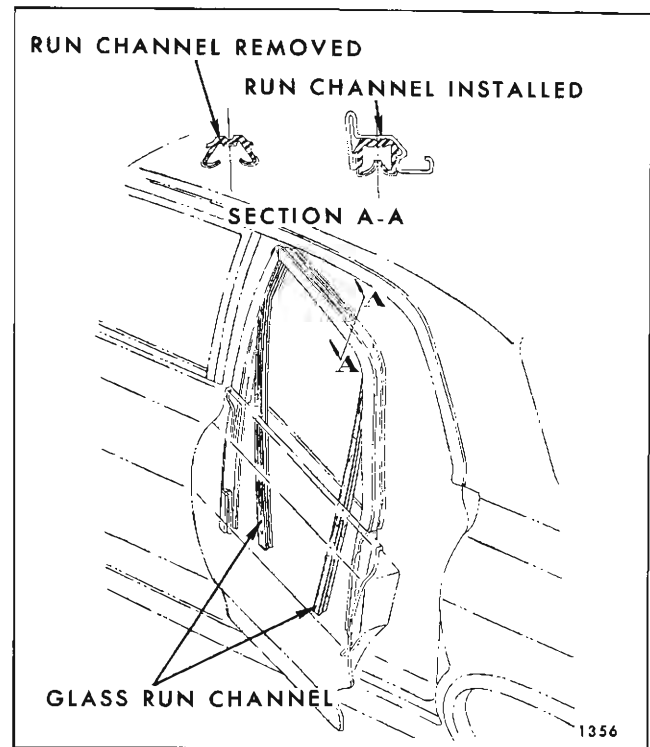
D42—"69" Style Rear Door Window Glass Run Channel Assembly
